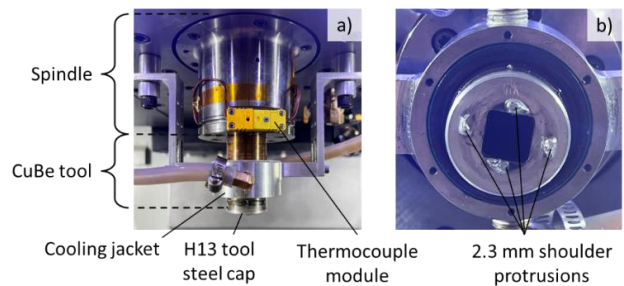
a) CuBe tool with H13 tool steel cap, thermocouple connection, and cooling jacket. b) Bottom view of tool showing shoulder face protrusions and 12.7 mm square feedstock bore.
